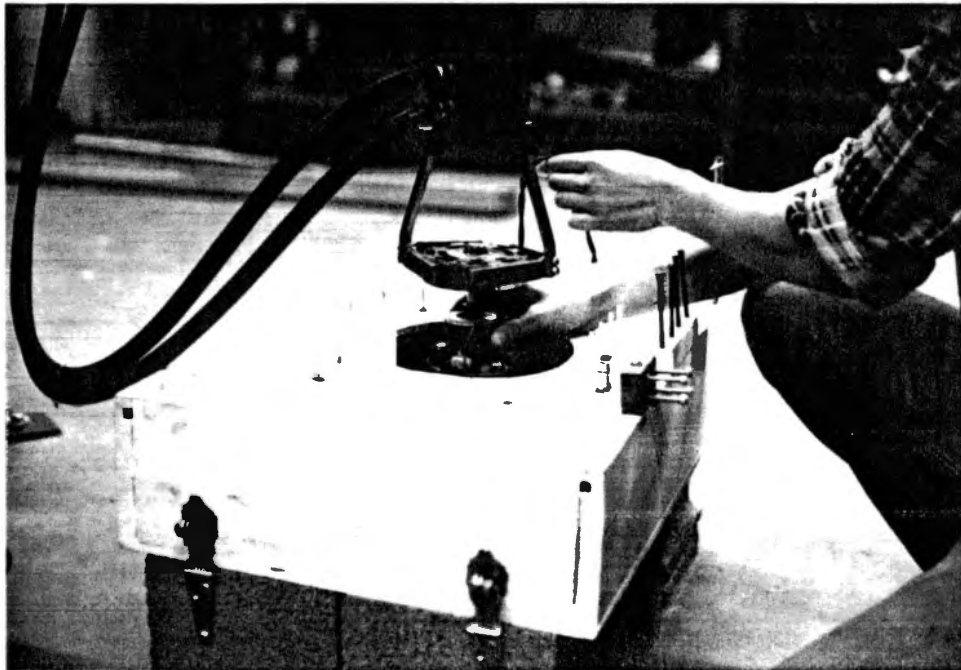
Human Worker Inserting Shaft Assembly and Threading Motor Leads through End Bell
